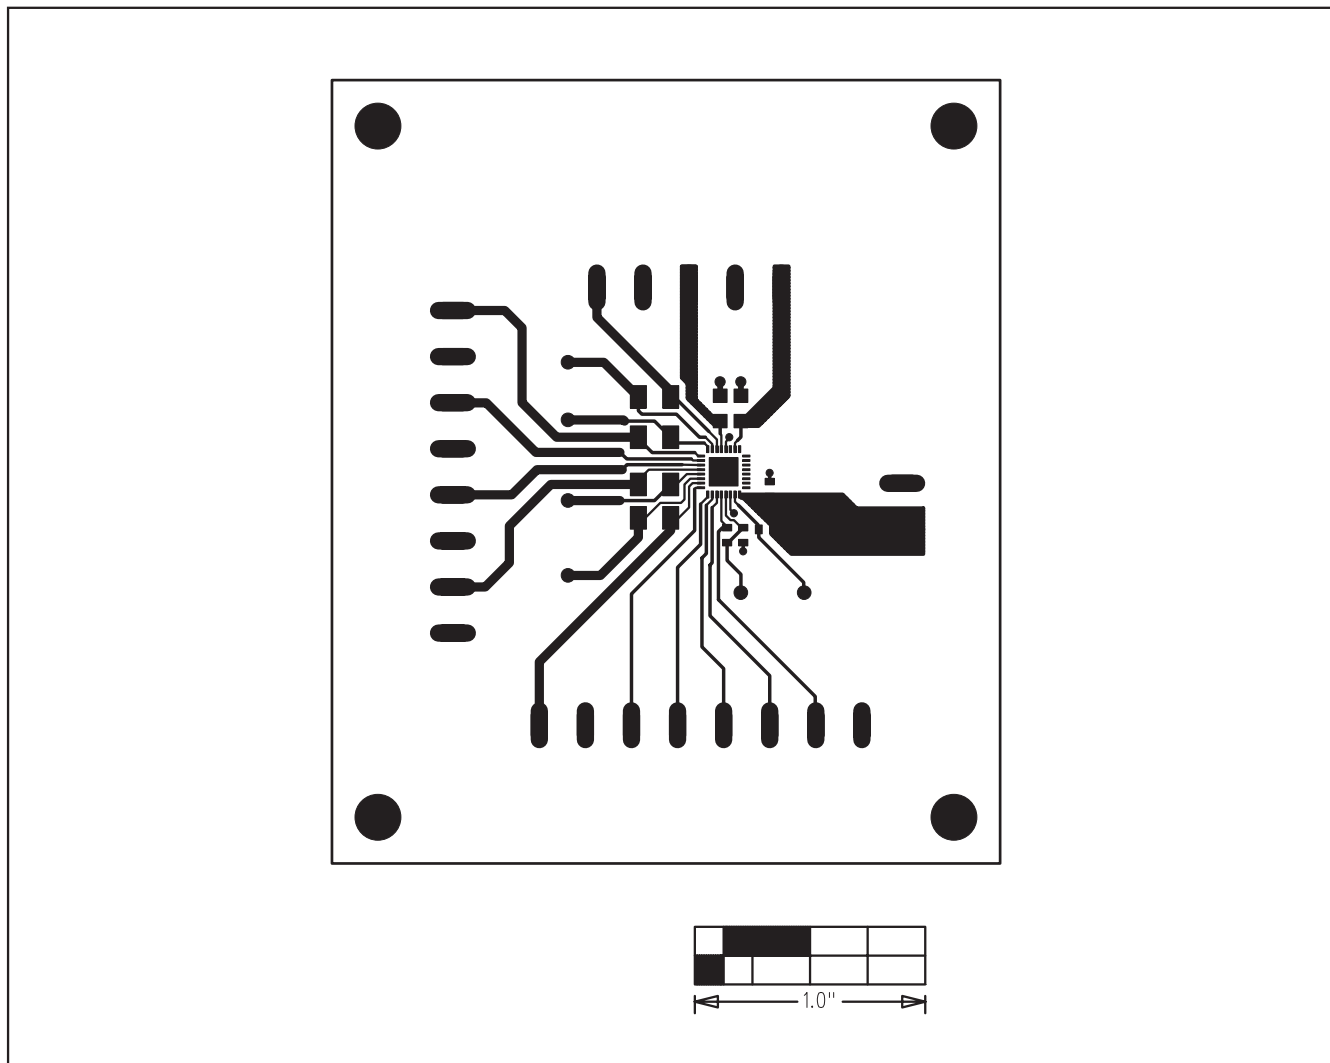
MAX17109 EV Kit PCB Layout—Component Side
